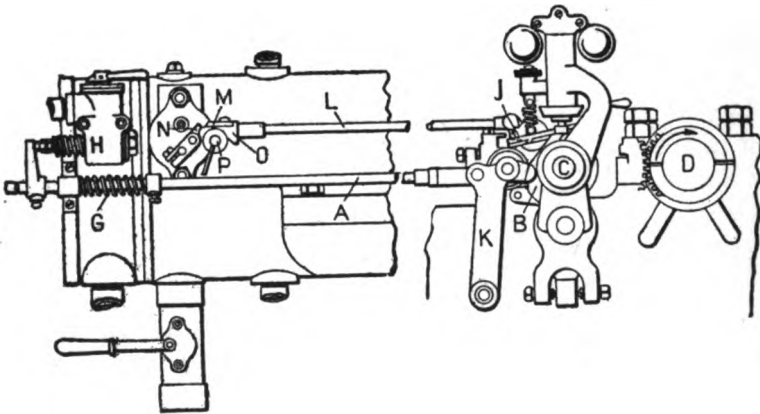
WAYNE ENGINE, VALVE GEAR AND GOVERNOR.
